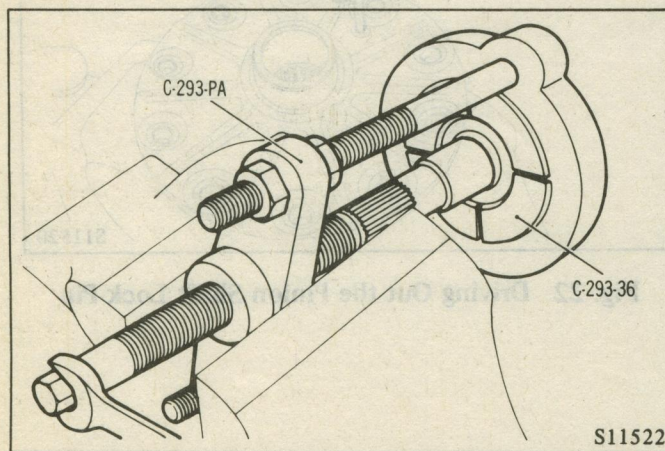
Removing the Drive Pinion Bearing (Rear)
